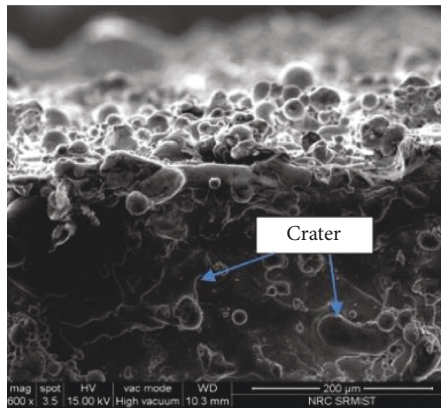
Machined surface using heat-treated brass tool with 600x magnification.
